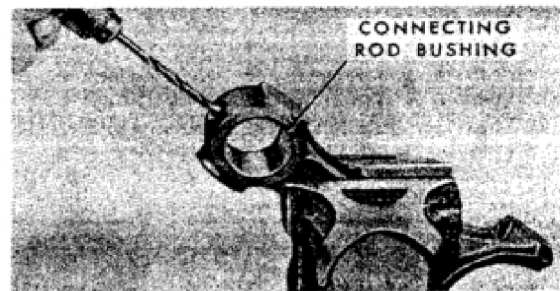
Oil hole in connecting rod bushing must be drilled after bushing is installed, but before reaming or honing bushing to fit pin.
